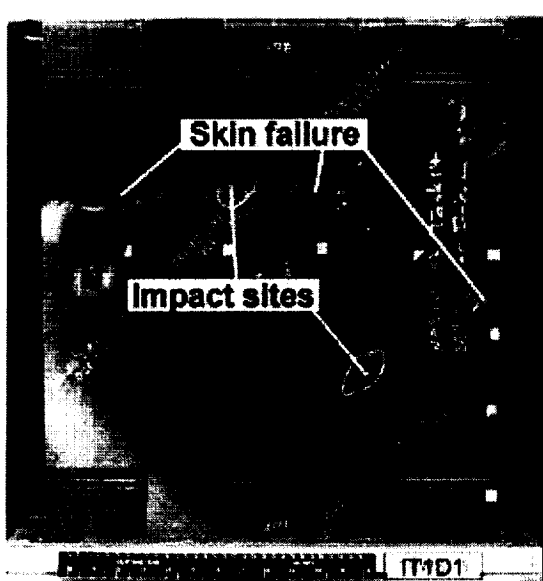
Failure location on skin side of Specimen IT1D1.
